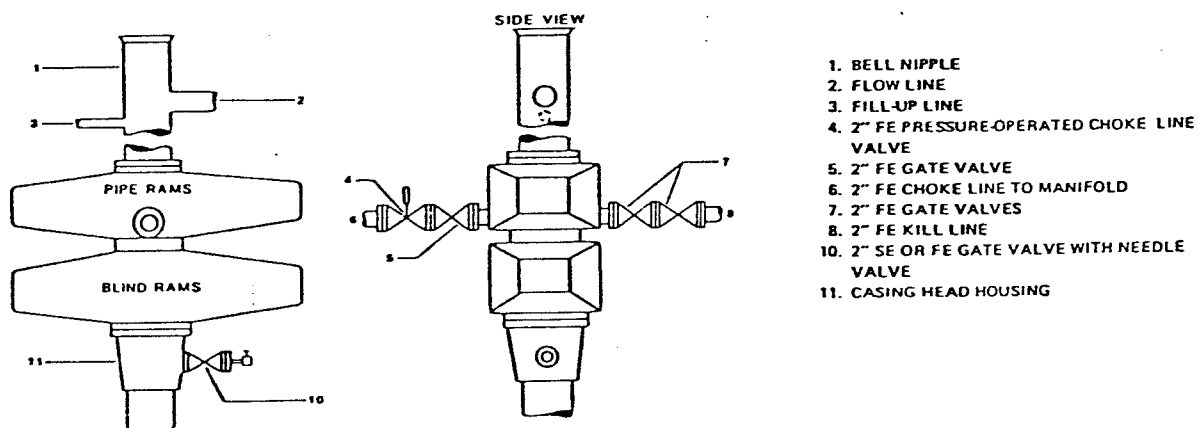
Standard Hydraulic Blowout Preventer Assembly
